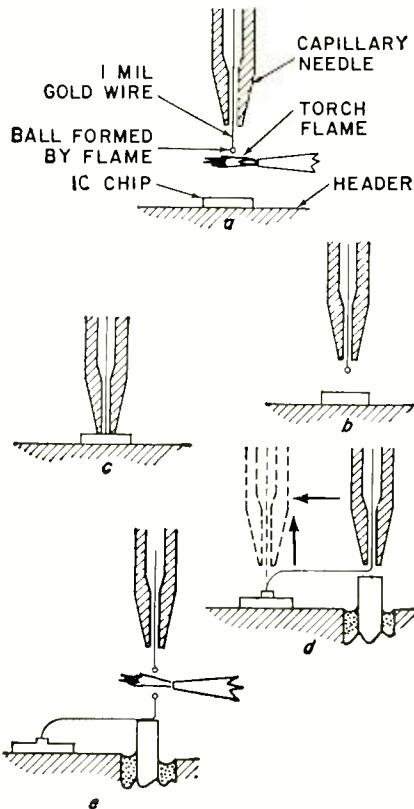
Steps a-e show bonding process. Gold wire is heated and melted ball is pressed to weld wire to pad. Capillary is raised and process repeated for the second (pin connection) weld point.
